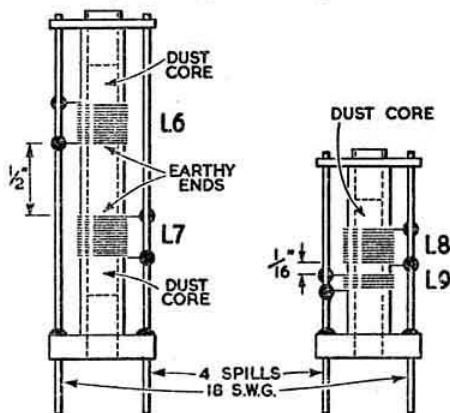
Sketch of the construction of the i.f. transformers. C7 and C10 lie between the spills inside the cans.
